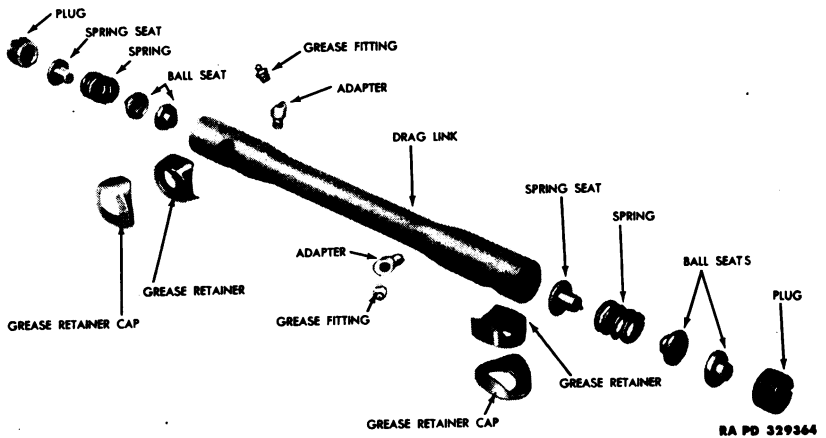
Steering Gear Connecting Rod (Drag Link) Disassembled.
